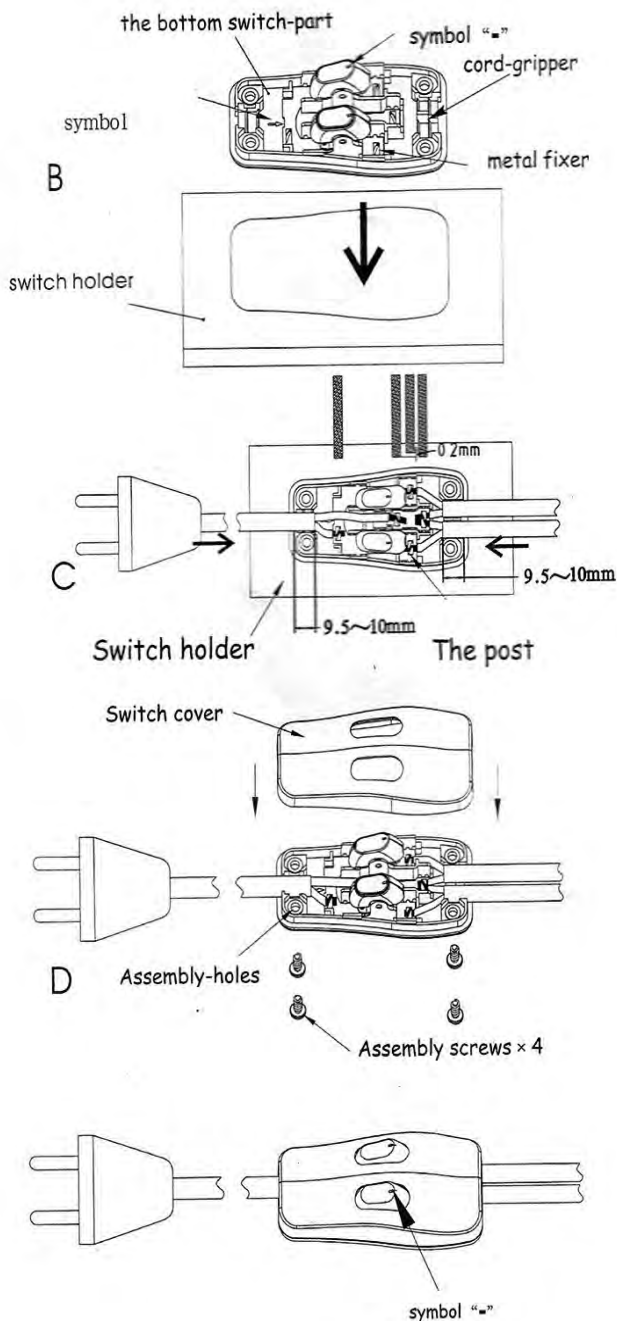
Figure D: Place the switch-cover on top of the bottom switch-part. Assemble them by fixing the 4 assembly screws through the assembly-holes, as illustrated. Screwing torque applied is recommended at 8kgf · cm. (On checking the connection / electrical conductivity after full assembly, the switch-button must be pressed "ON", to see if the connection / conduction is done and then pressed "OFF".)
